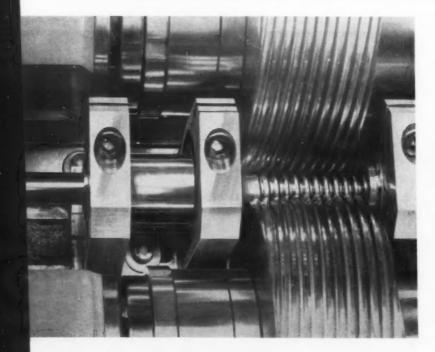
Forming 3/4-6 lefthand Acme threads along a 20-foot steel bar on a cylindrical-die machine. Two horizontally opposed thread-rolling dies are used.
